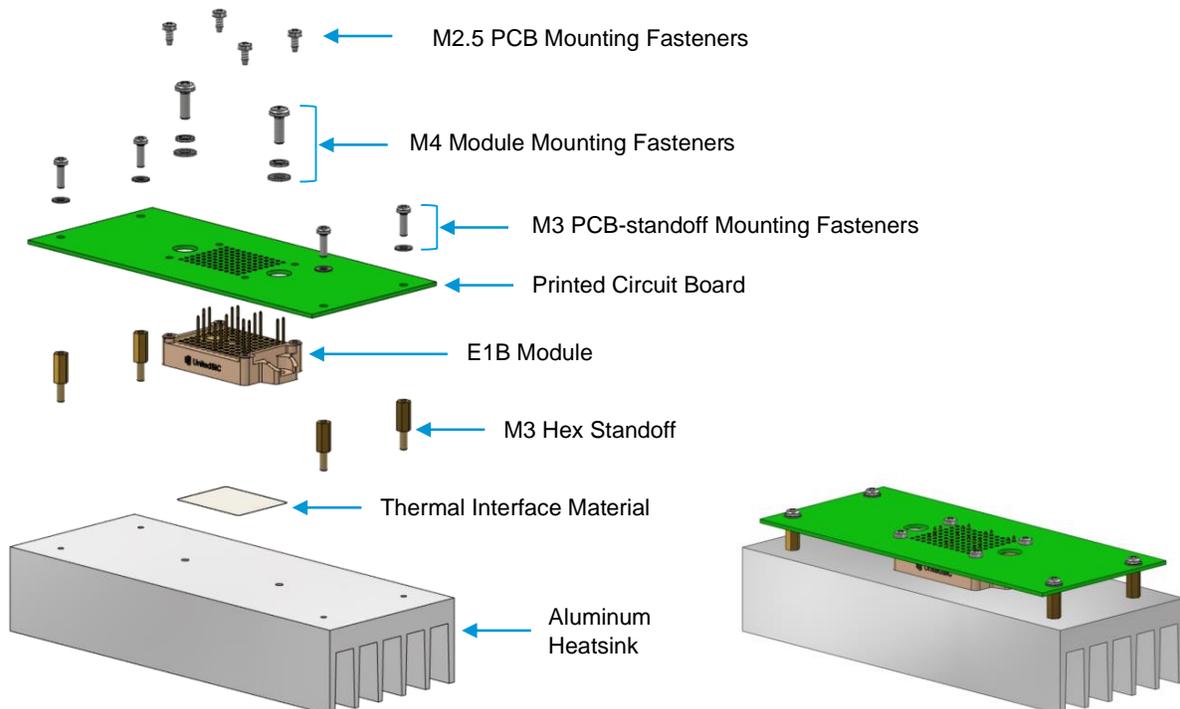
Module Mounting with PCB and heatsink (assembly exploded view).
